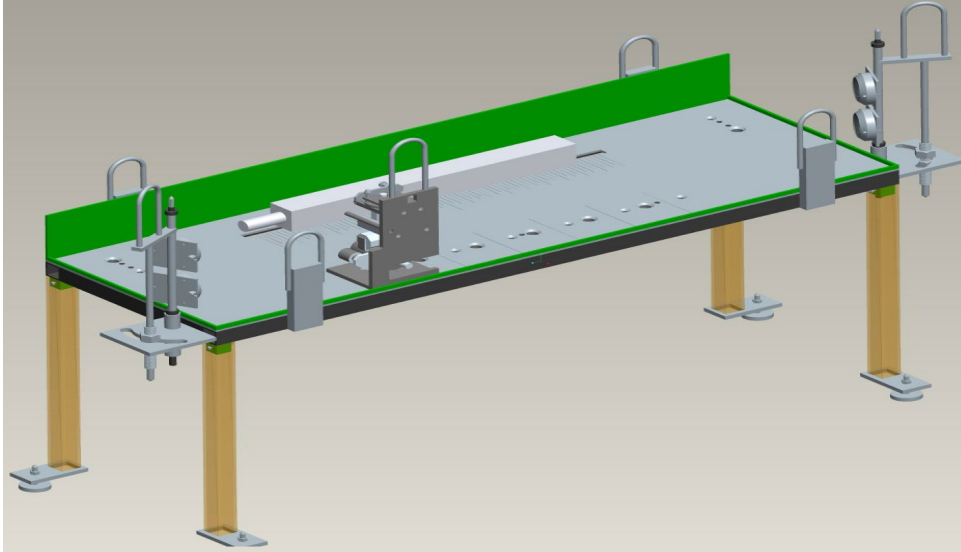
The L Basin MTR Fuel Inspection Table isometric.
